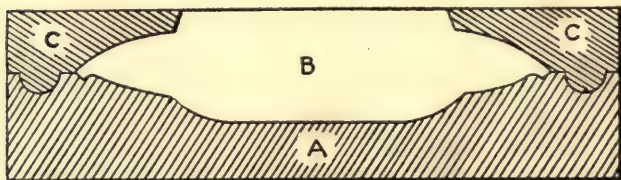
A*, bottom of case. *B*, Cavity for pouring molds.
